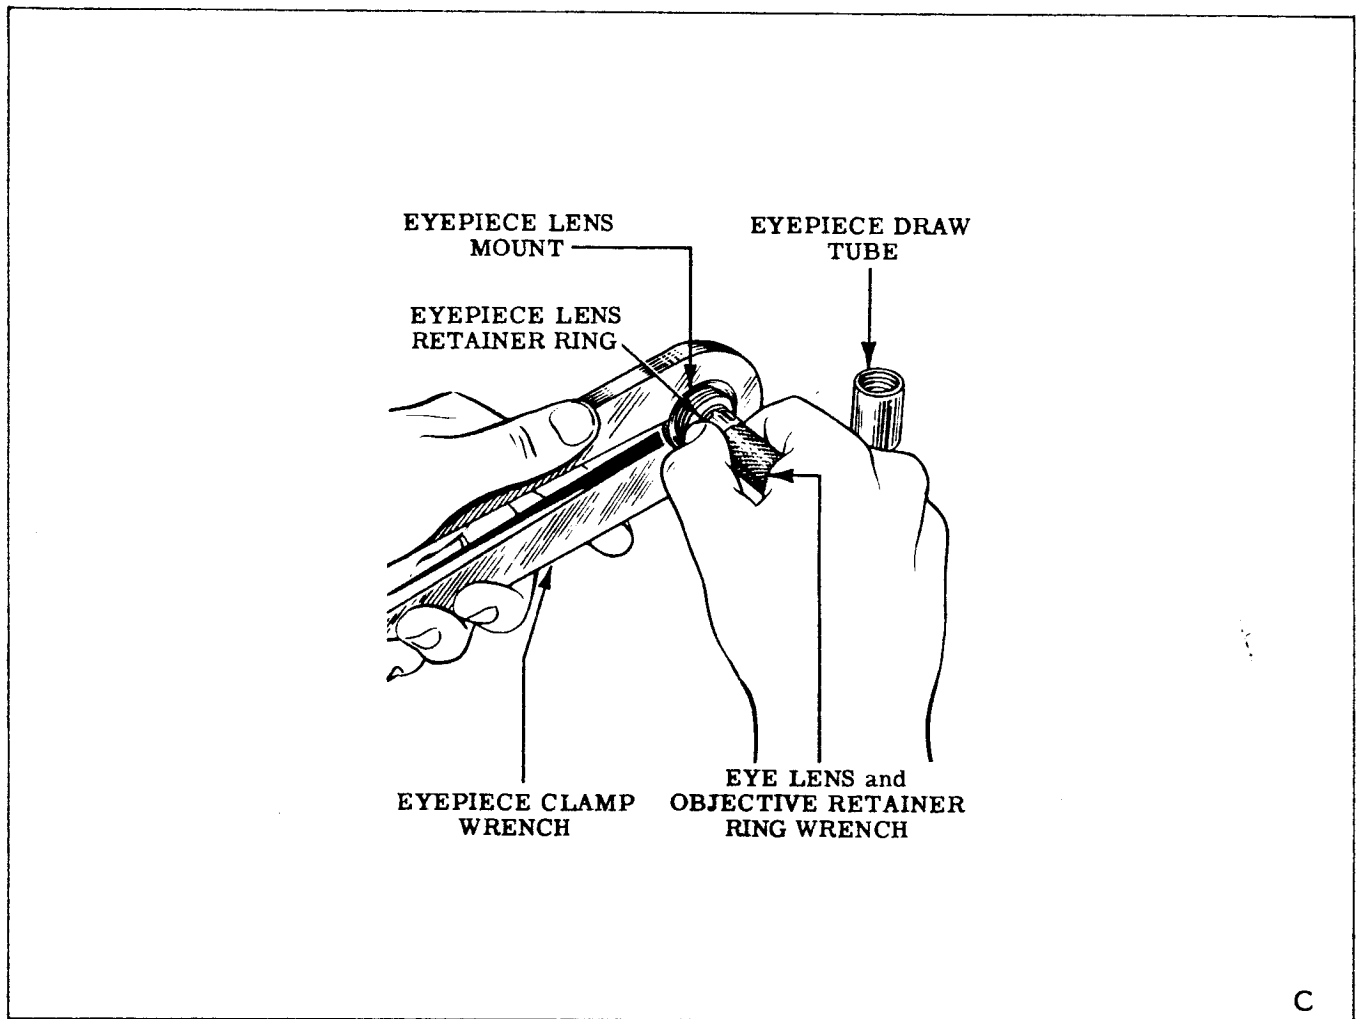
Stadiometer Telescope Assembly Disassembly Operations
